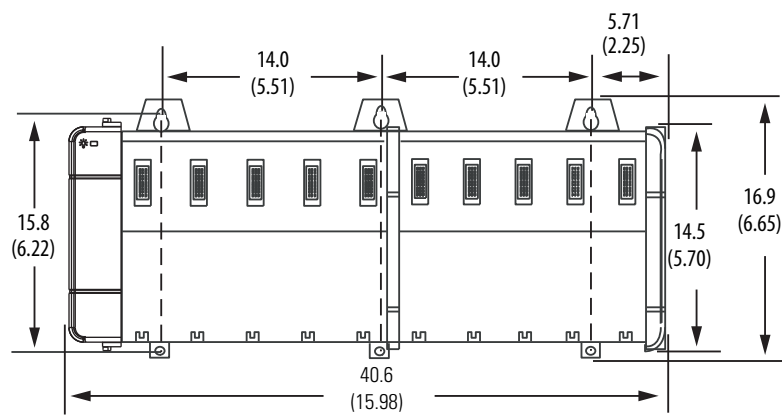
1756-A13/B Chassis and Chassis Adapter Module
